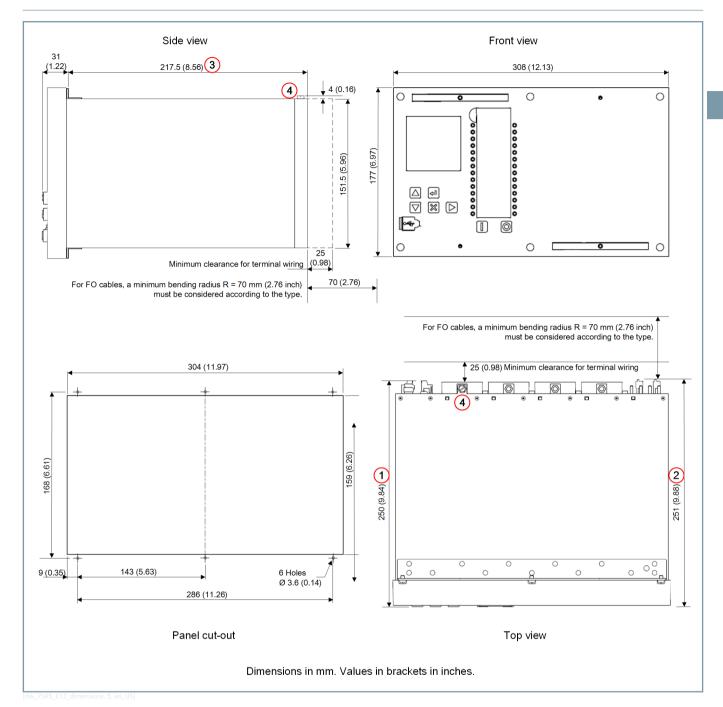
/27 Size 12 Case: Dimensions and Panel Drilling Details
